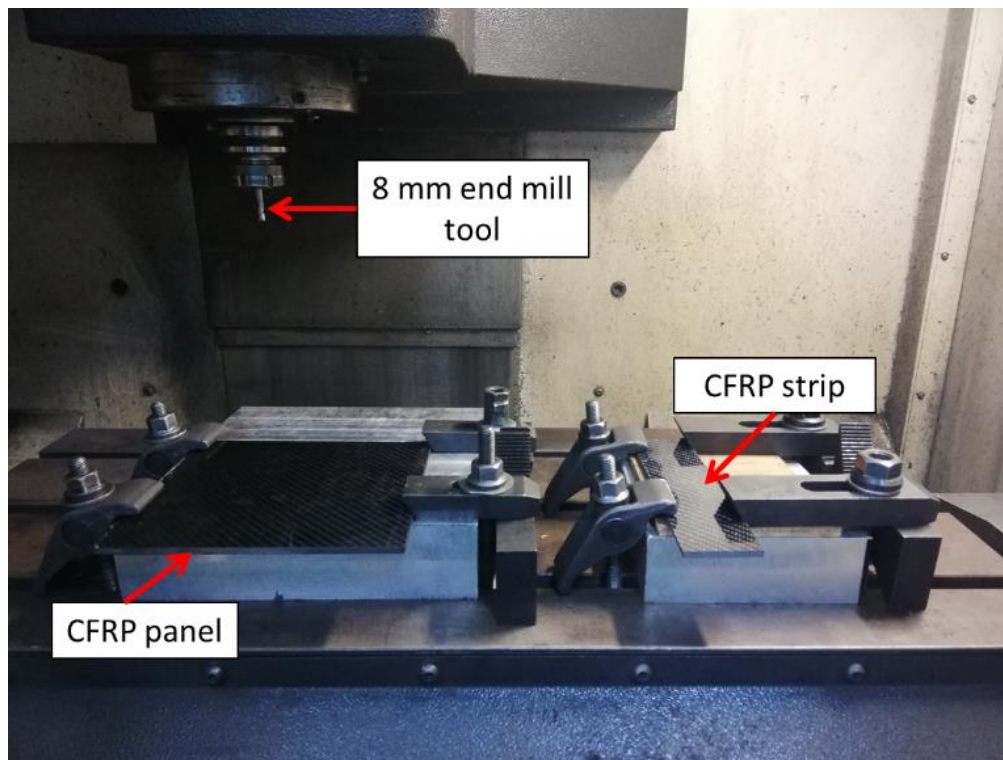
Overall experimental set up for milling of CFRP using Mazak CNC machine.
